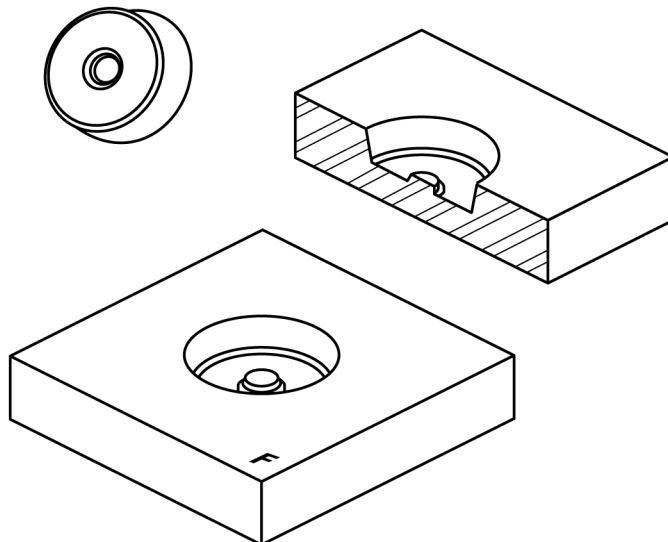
Type A Mold—Open Mold—Open Cavity Mold and Sample
